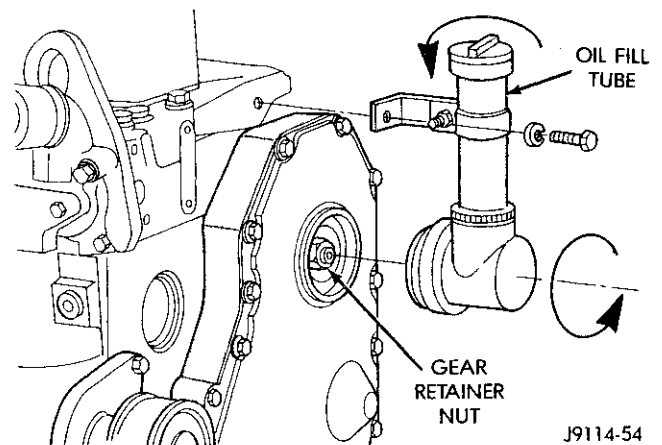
Oil Fill Tube, Adapter and Mounting Bracket
